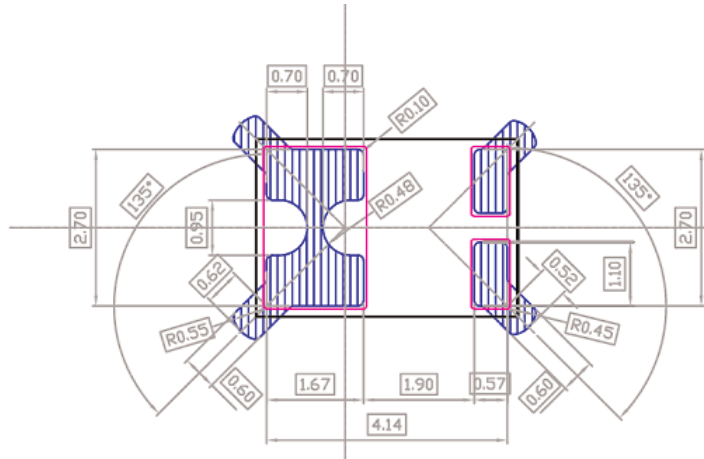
Solder stencil for footprint with two thermal vias and four solder-ability indicators.
